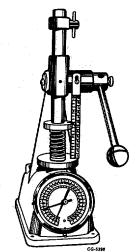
Checking Spring Tension Using SE-2241 Tester
